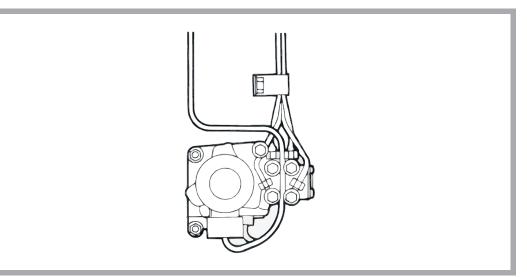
The eccentric shaft bypass valve improves engine performance at start-up.
